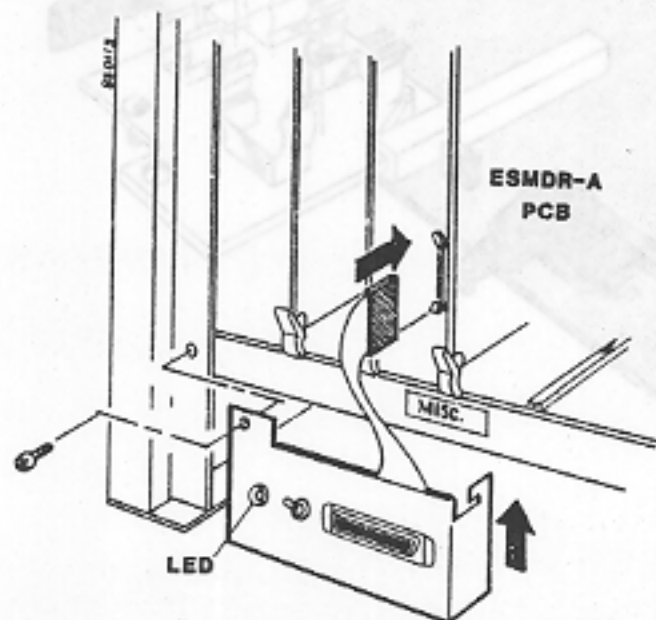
Mounting Cable and Jack Assembly to the KSU.
